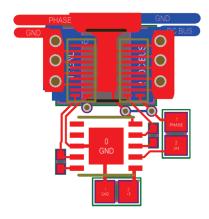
Single sided inverter leg PCB using LGA packaging.
